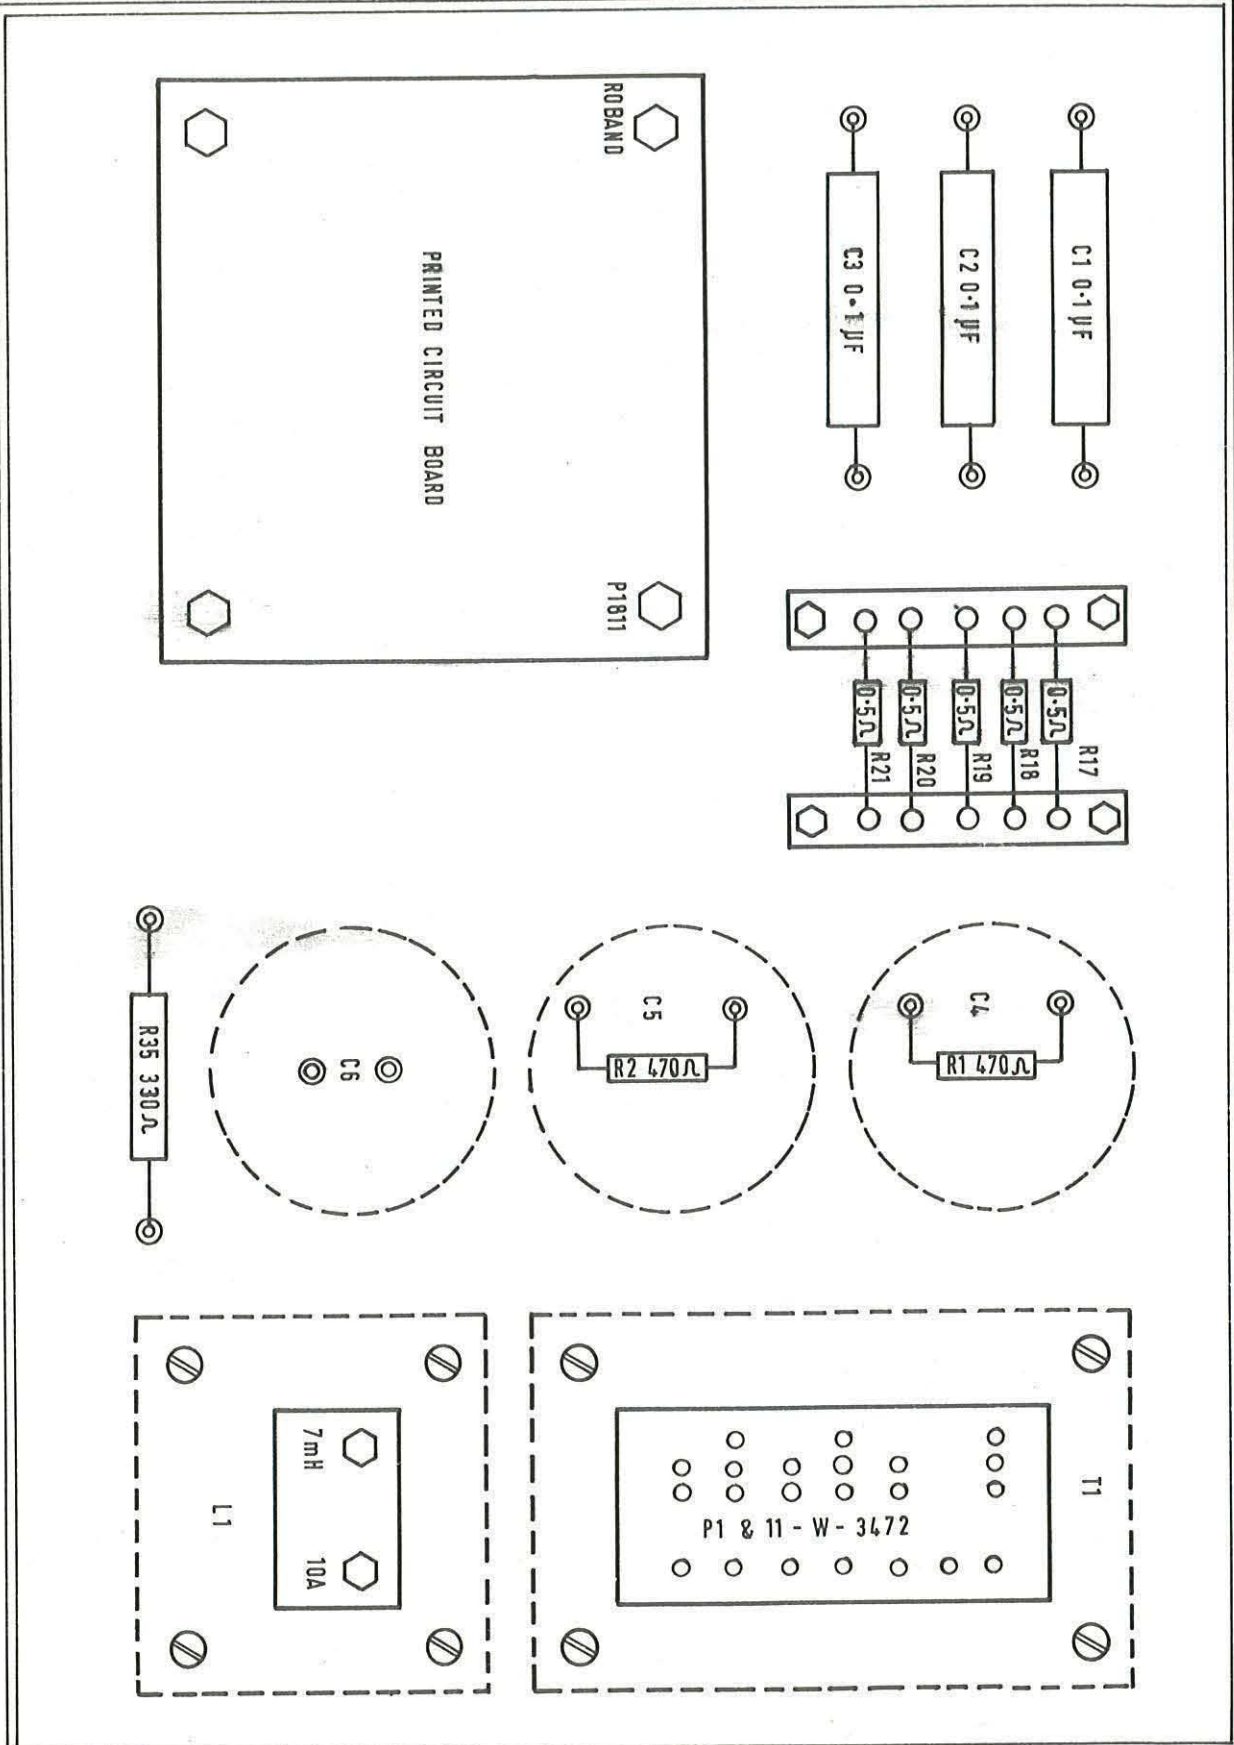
Power Supply Unit. (Bottom of Chassis)
